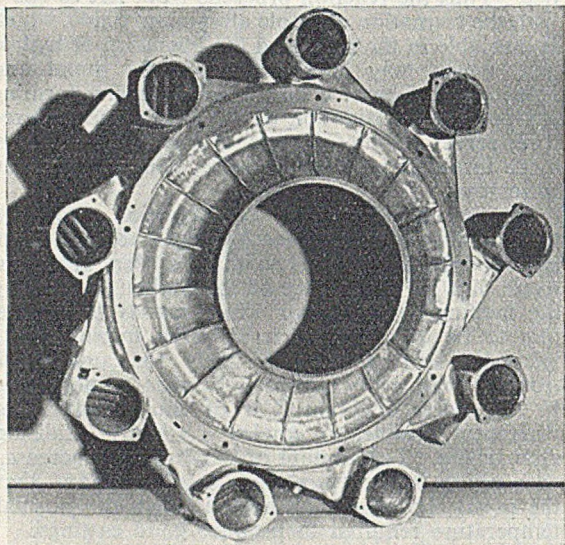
Compressor Casing for Derwent 5 Gas Turbine, Sand Cast in R.R.50 Alloy. The Cascade of Guide Vanes is made from Extruded Bar and "Cast In."
